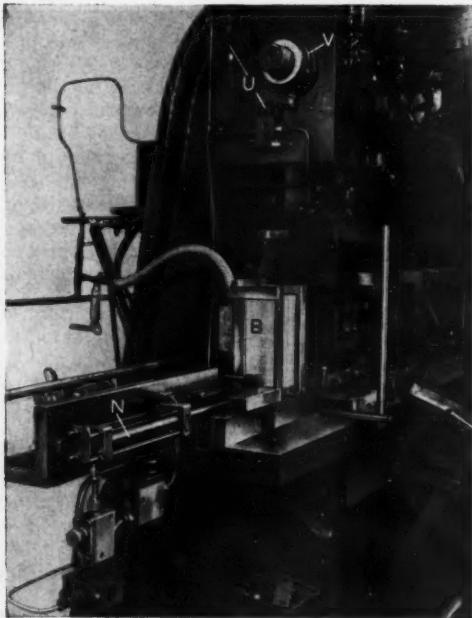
A view from the left-hand end of the special press, showing the magazine of the Adrema multi-stage tool, also the air cylinder for operating the shuttle bar that feeds blanks and transfers workpieces from one station to another
